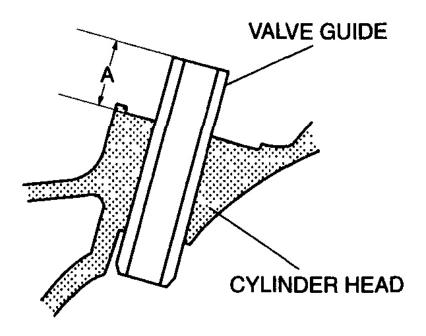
Calculating Valve Stem To Guide Clearance Courtesy of MAZDA MOTORS CORP.
